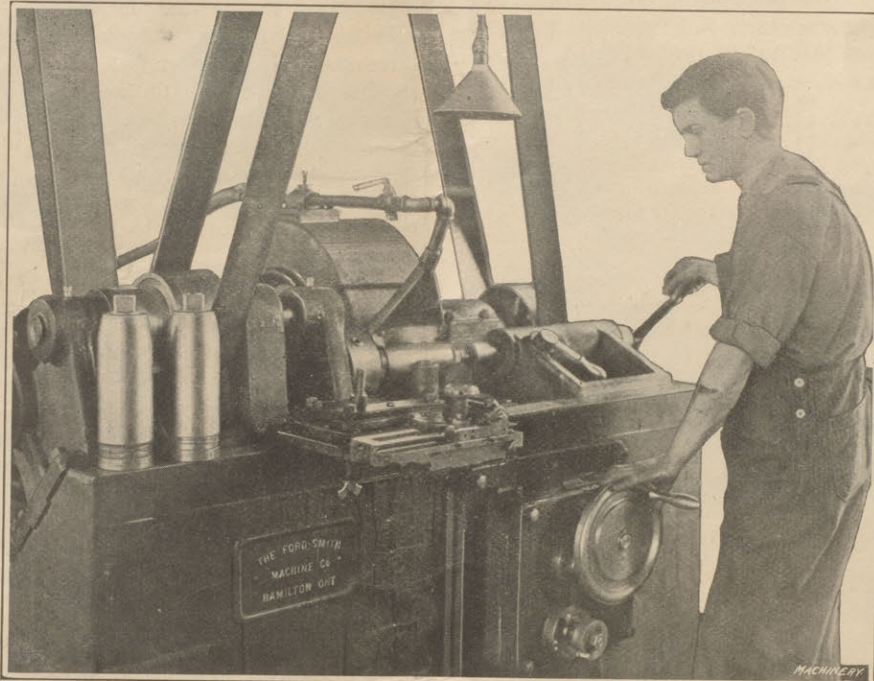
Grinding Shrapnel Shells in One Operation in a Ford-Smith Grinding Machine
